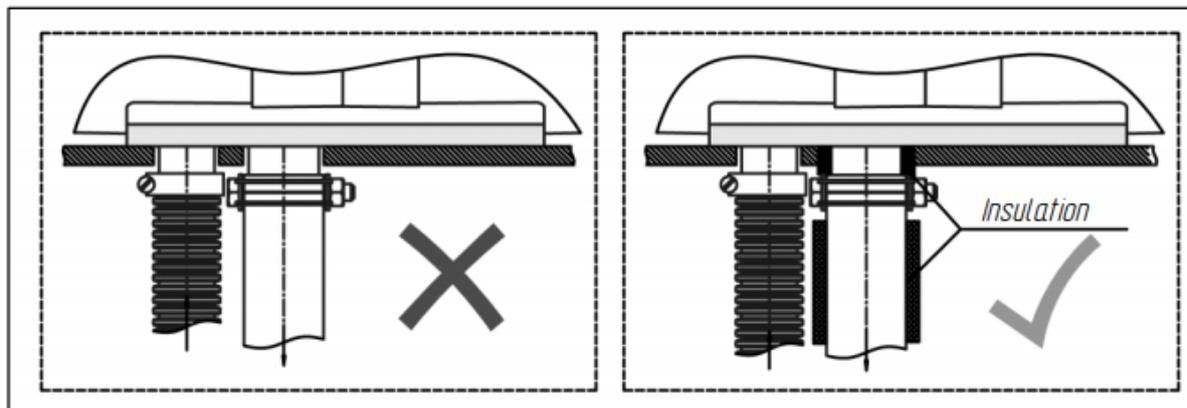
Attachment of the exhaust pipe to the heater and usage of rubber bushing
